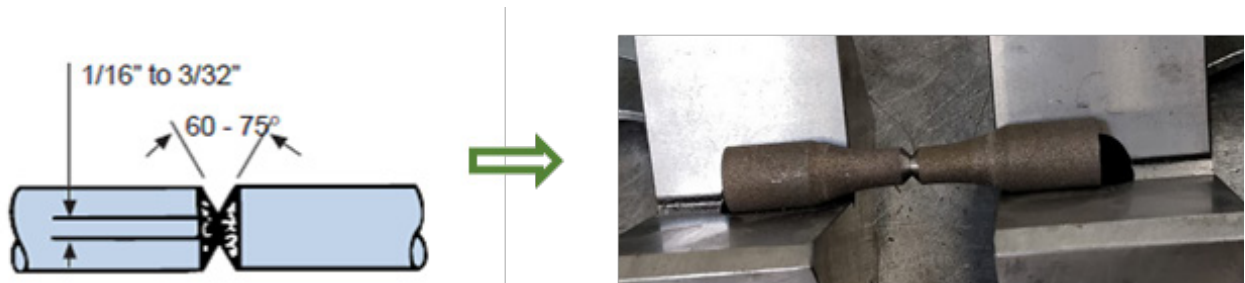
Layout and weld preparation of round fatigue samples
